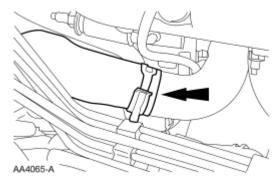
Lower Radiator Hose Courtesy of FORD MOTOR CO.
